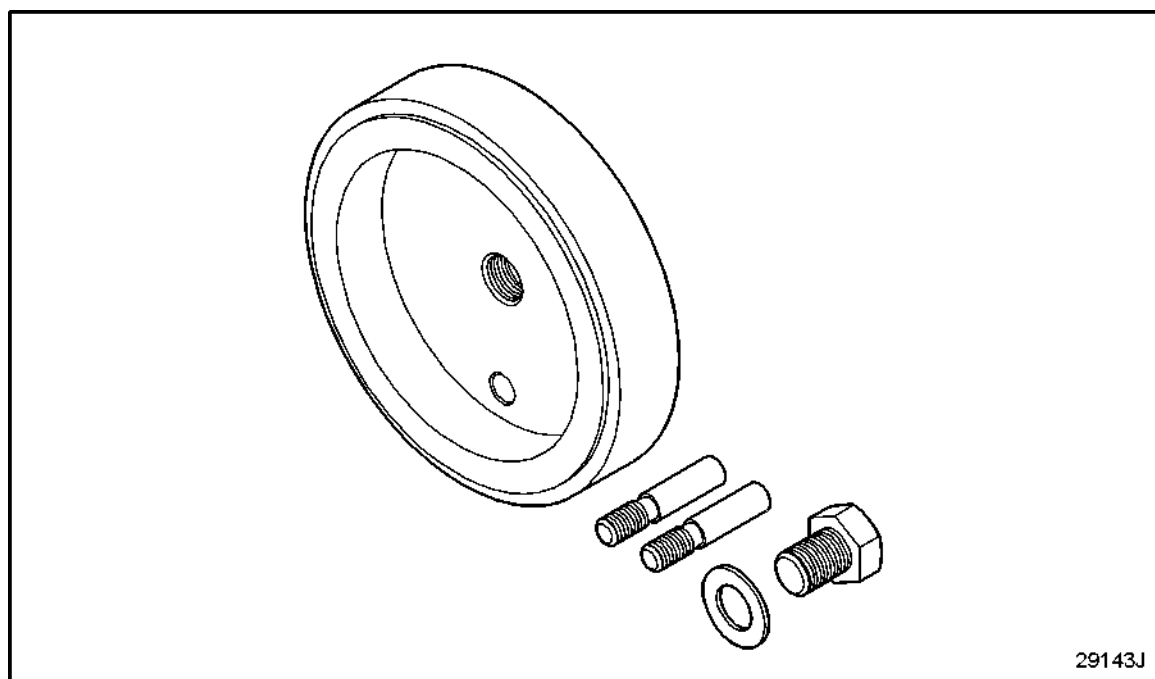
Rear Seal Installer (STD Seal),J 29010-B
